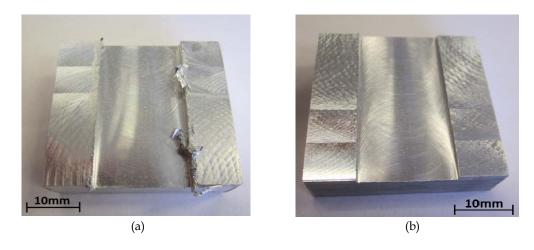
Slot-milled machined parts with (a) large burr formation, (b) burr formation with tiny scales
